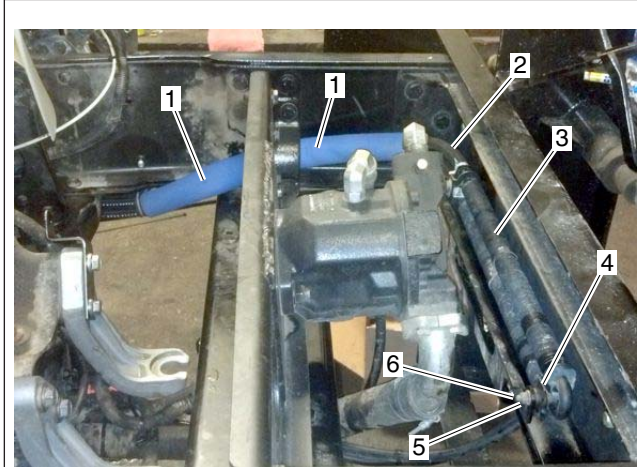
, Power Steering Cooler Mounting Bracket Installation
